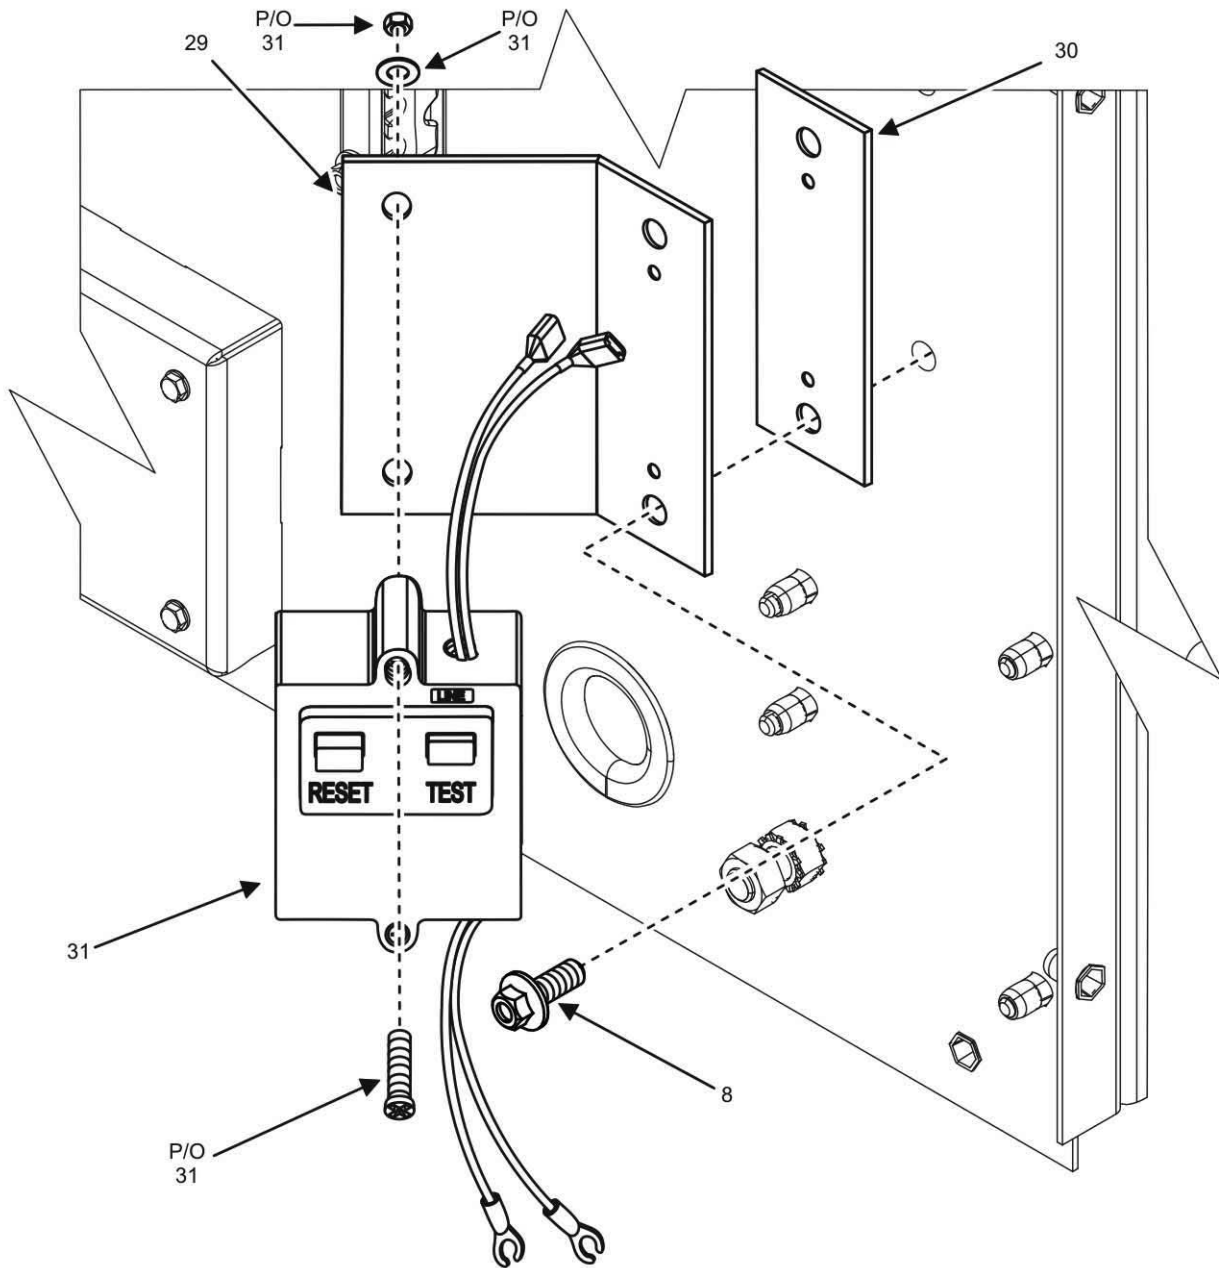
Convenience Receptacle Assembly (Sheet 3 of 7).
